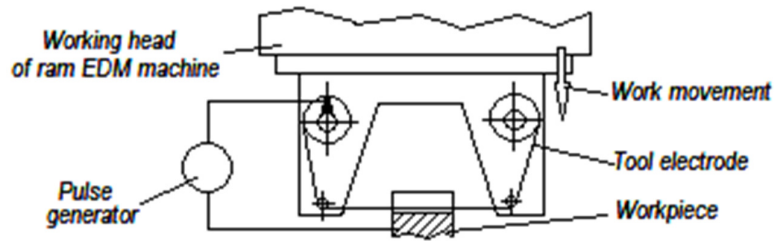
Schematic representation of the device for wire electrical discharge machining using a wire tool electrode adaptable to a ram electrical discharge machine
